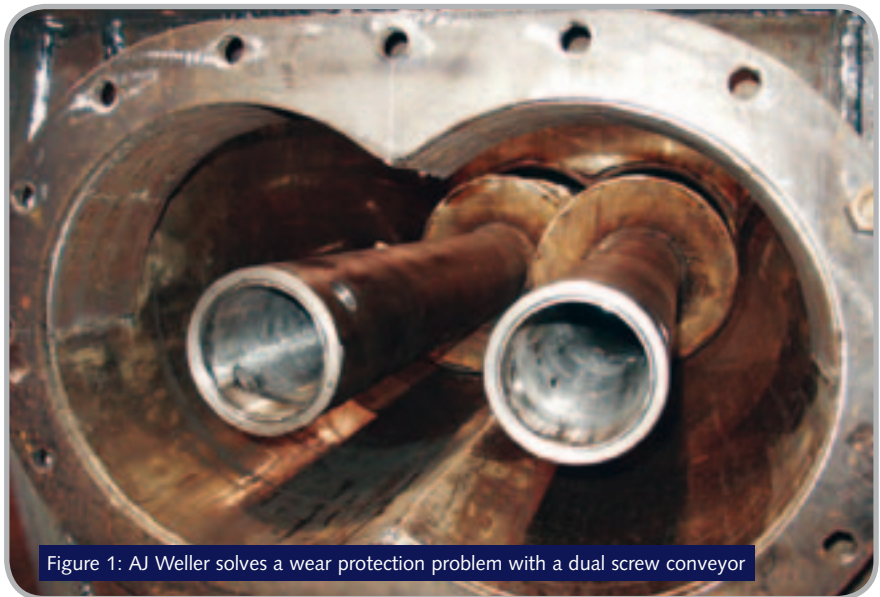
AJ Weller solves a wear protection problem with a dual screw conveyor
